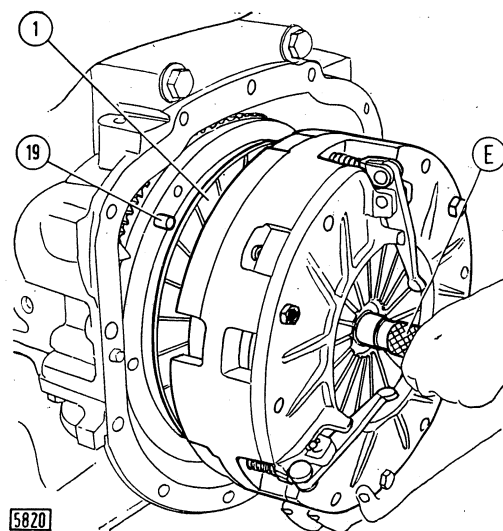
Removing (refitting) the 11" clutch unit from the engine flywheel.
